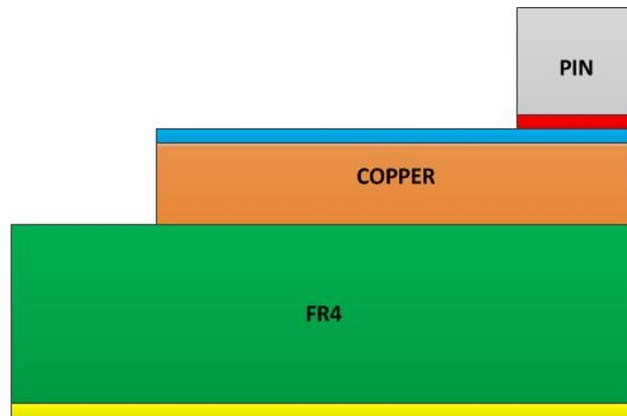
Example showing the proposed process, specifically, by schematizing the PCB structure composed of a pin (being part of a device), a copper layer, and an FR-4 layer.
